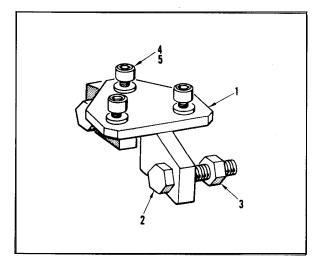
Vibration Transducer Combustion Flange Adapter Assembly, Part No. 171573, Location of Parts
